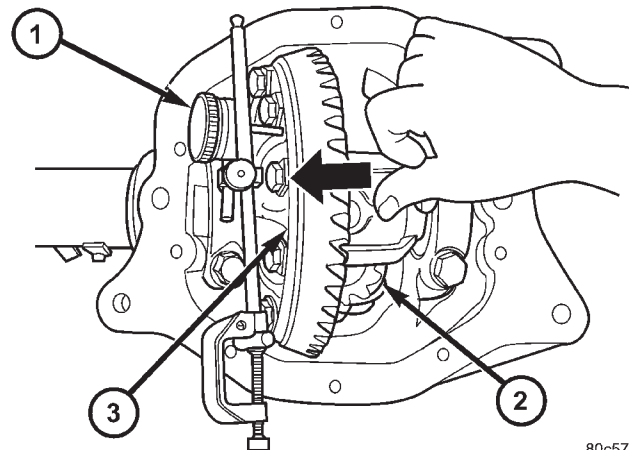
DIFFERENTIAL RING GEAR SIDE
